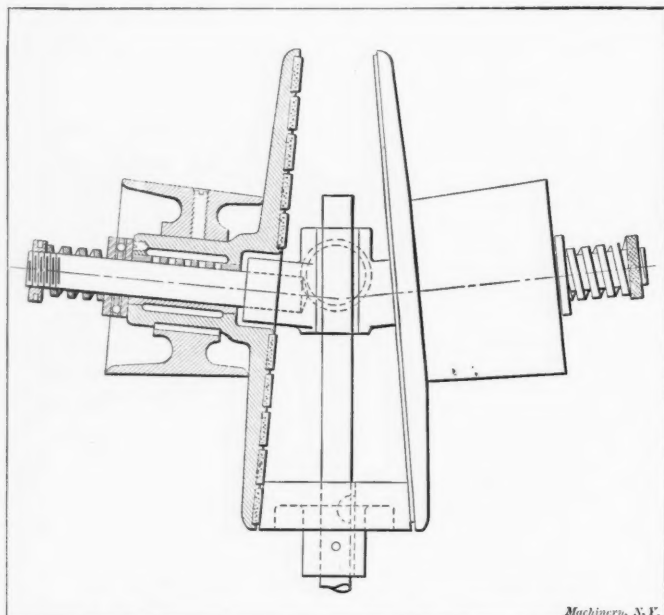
Friction Feed Disks and Mounting of Idler Pulleys
